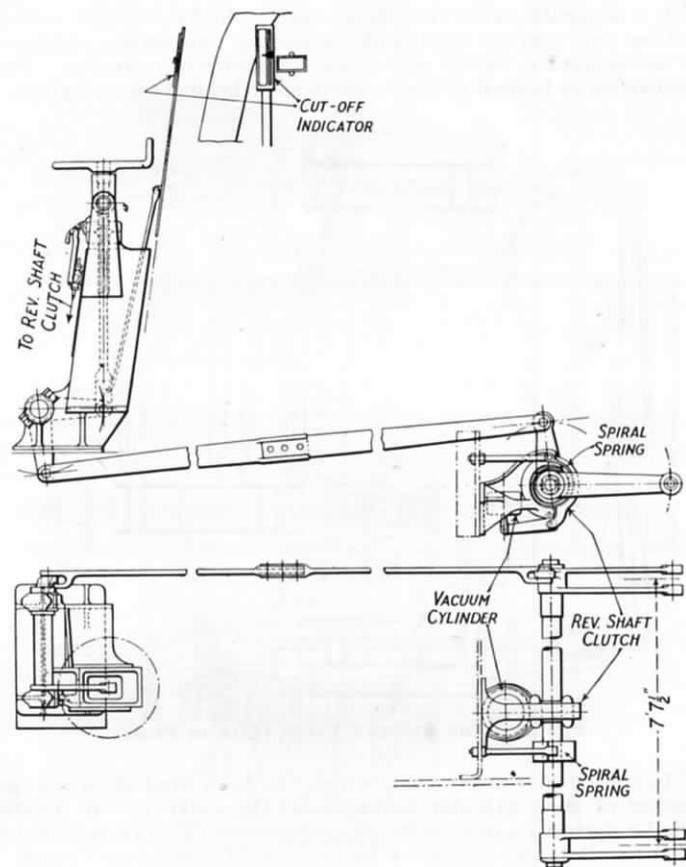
SCREW REVERSING GEAR OF L.N.E.R. 4-6-2 EXPRESS LOCOMOTIVE.
